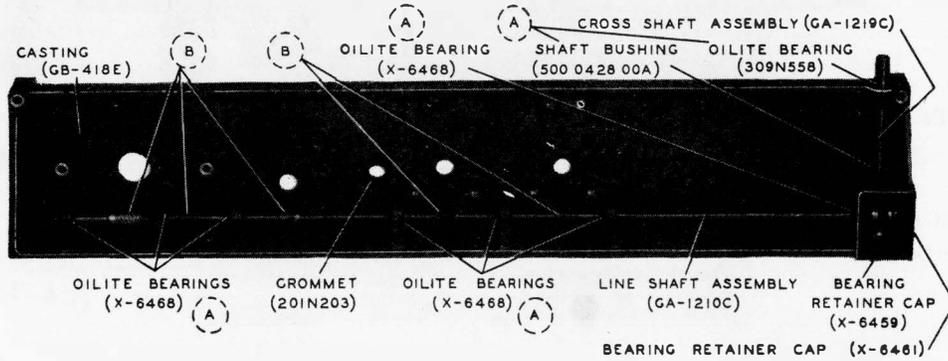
R-F Exciter Unit Autotune Assembly (Units Removed)
